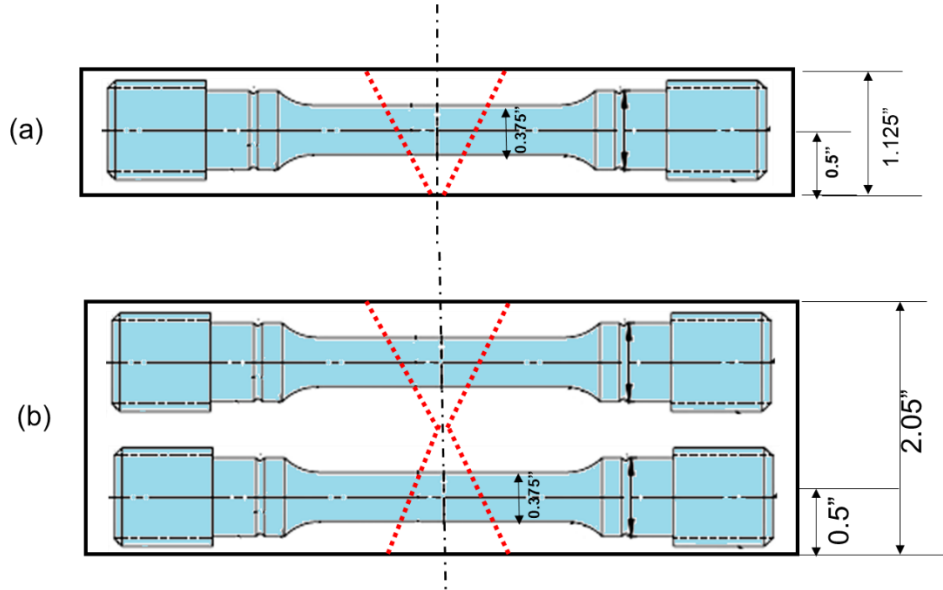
Schematics of the location of the cross-weld weld creep specimens.
